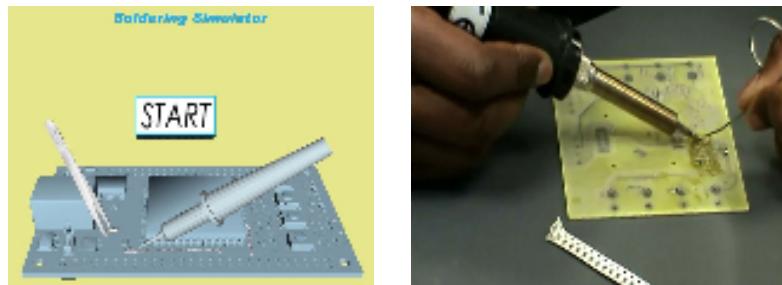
Virtual (left) and Real-World (right) Soldering Environment
